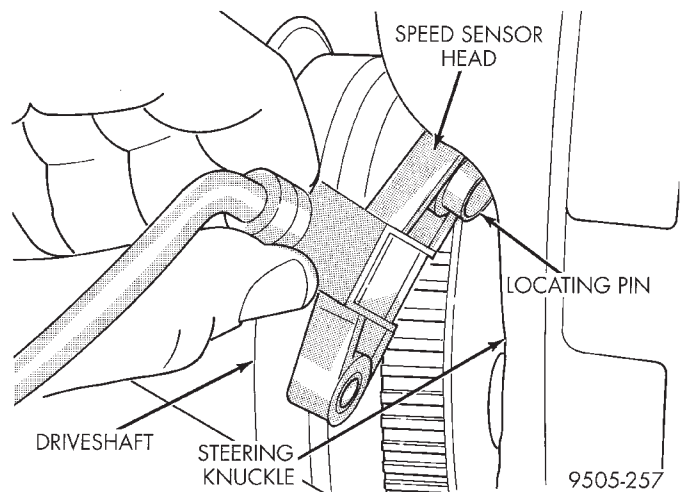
Installing Speed Sensor Head In Steering Knuckle
